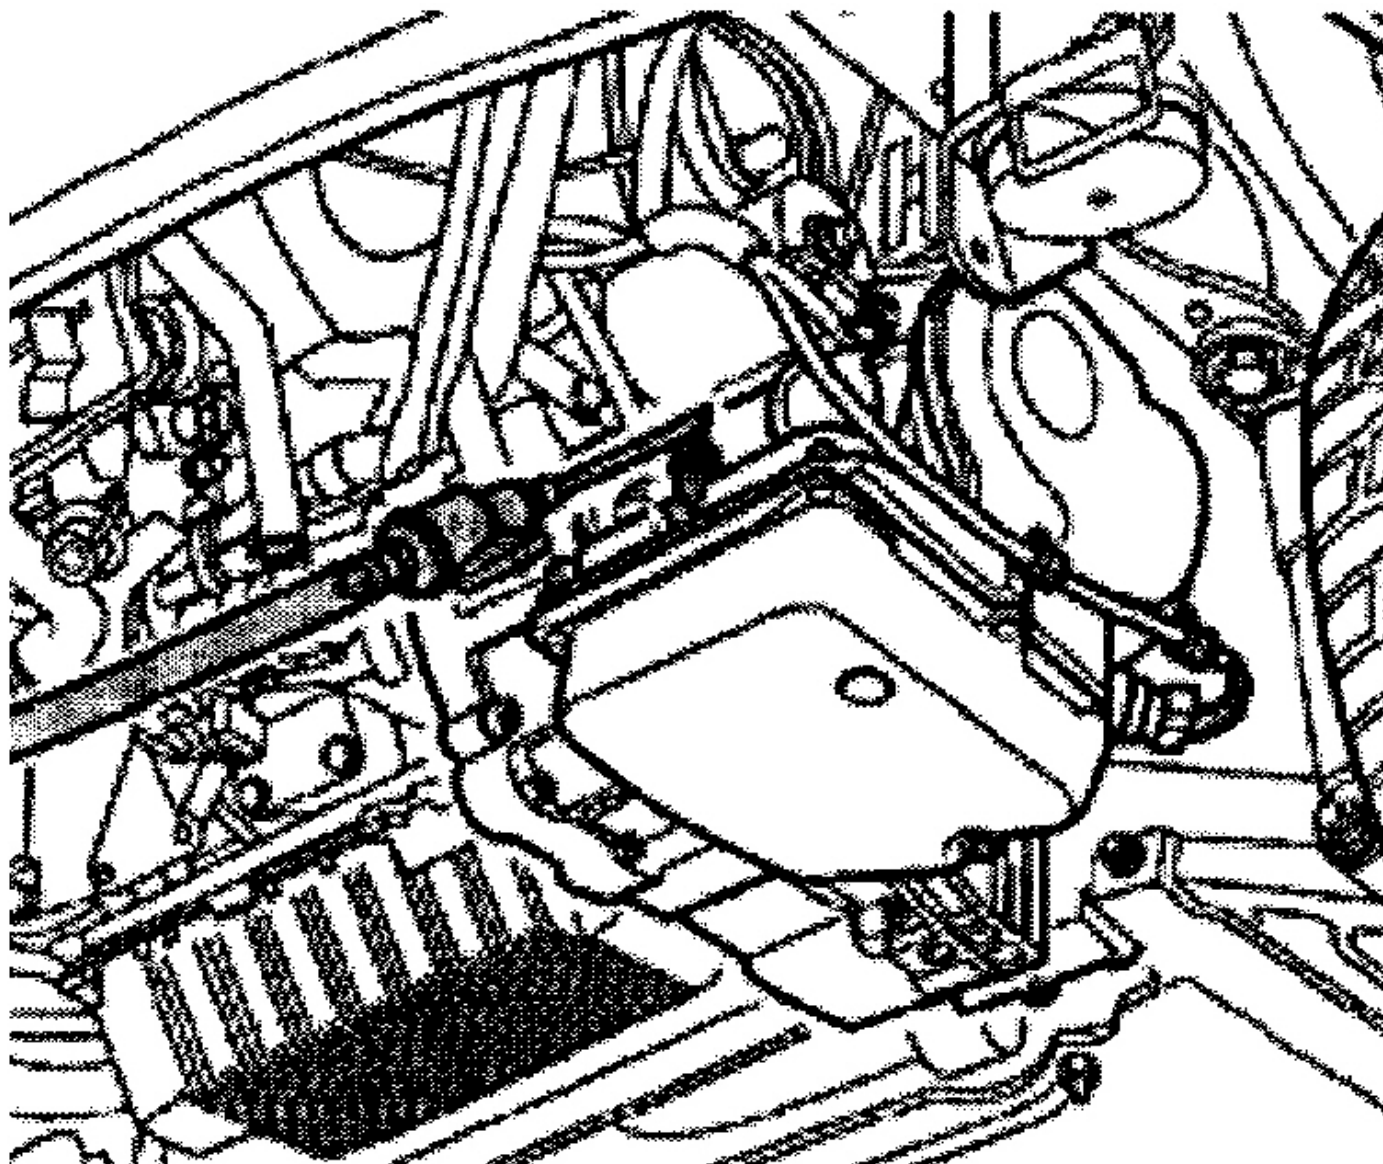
Locating Plug Seal, Overfill Pipe, Sealing Plug & Cap
